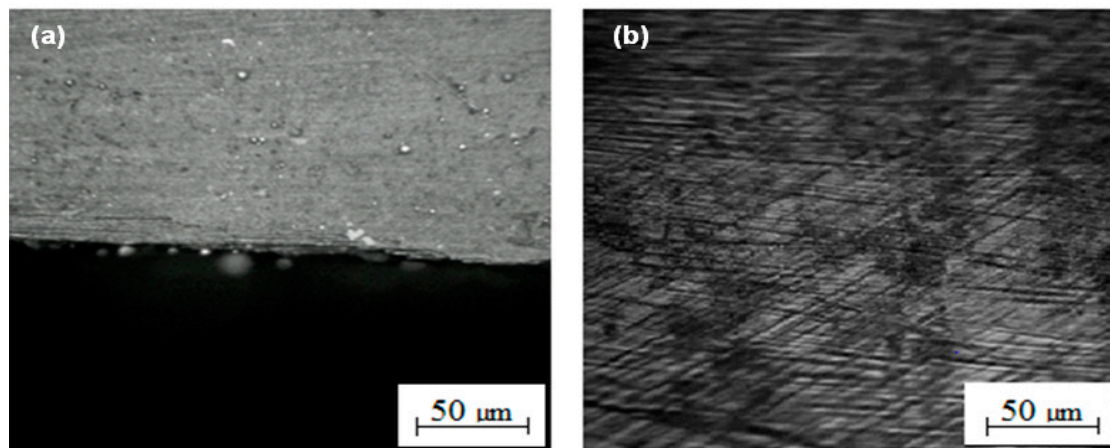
Machined PCM surfaces after application of a conductive Ti-layer on the surface of PCM; (a)—sheet surface at the processing zone (at the edge), (b)—along the cross-section of sheet width.
